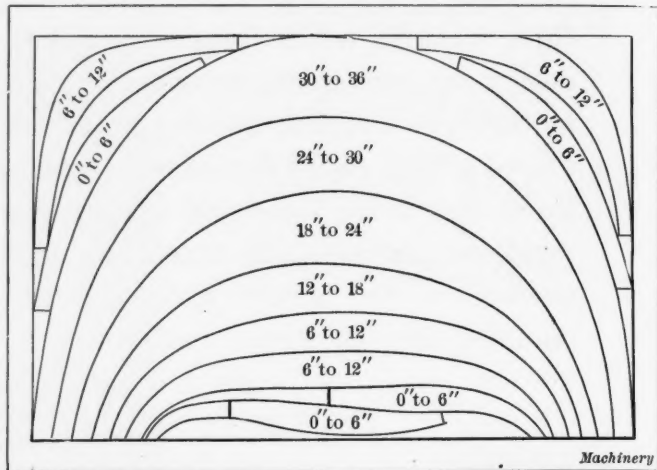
Method of cutting up a Sheet of Aluminum for a Set of Micrometer Frames
